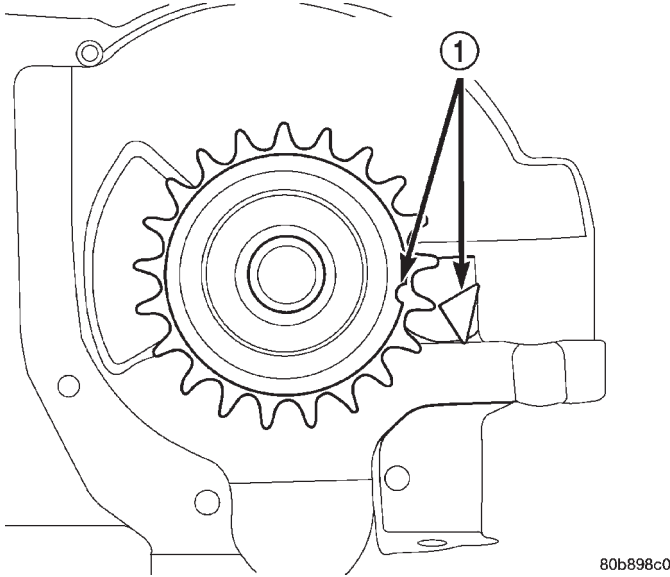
Crankshaft Positioned At 60 DEGREES ATDC No.1 Cylinder
